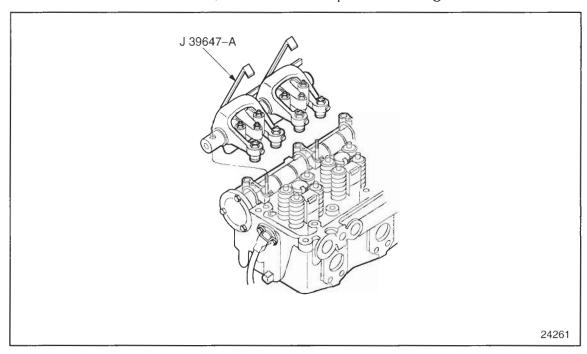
Rocker Arm Shaft Assembly Removal and Installation
